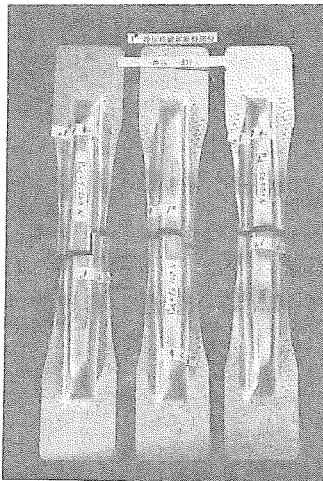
Failure Fractures of 1 STF Specimens (Depth/Width=1.0)
